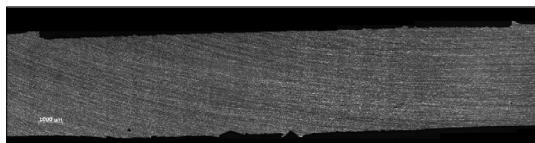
Cross-section of specimen welded by tool 1 at a feed rate of 125 mm/min.
